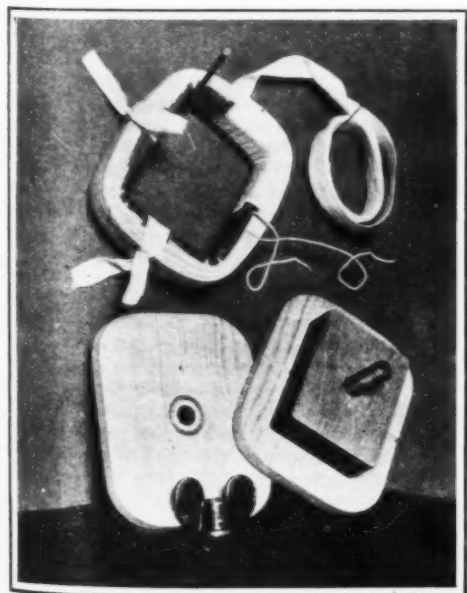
COIL WINDING FORM AND PARTLY TAPED COIL.
